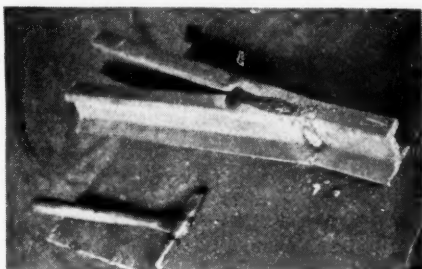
First welding step in making a frog at Seymour. Note arrow for use in later bending operation.
